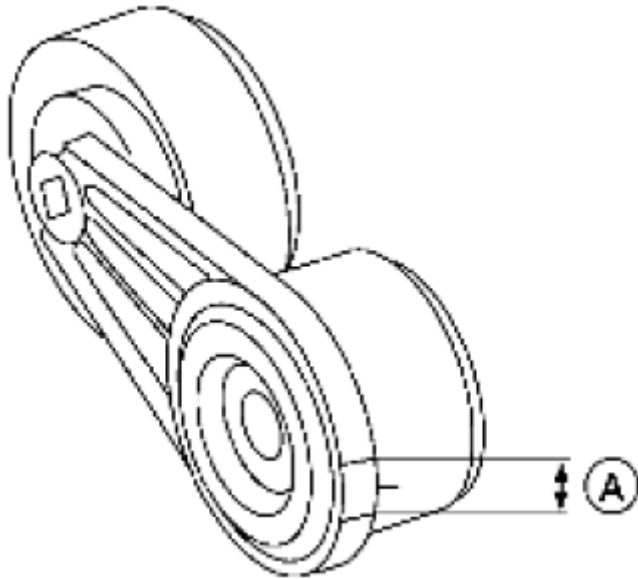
Identifying Auto Tensioner Indicator Allowable Working Range
